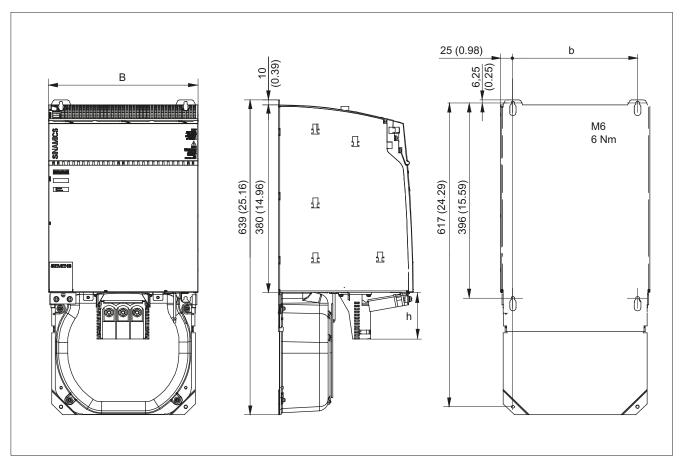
Dimension drawing of 80 kW and 120 kW Active Line Modules with internal air cooling, all dimensions in mm and (inches)
